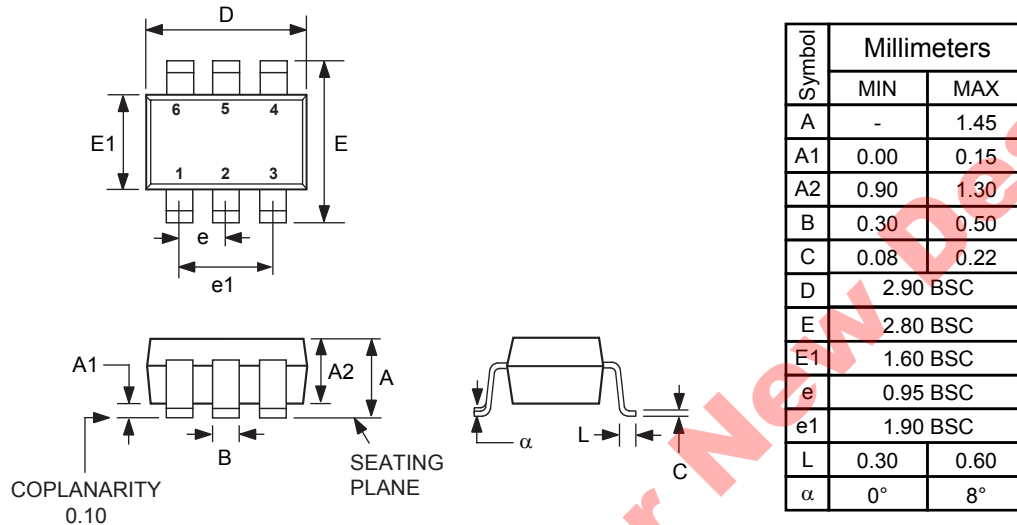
Physical dimensions, 6-lead SOT-23 package
